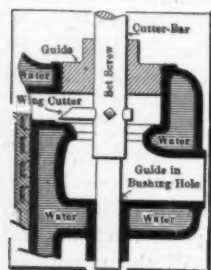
Section of a cylinder through a valve, showing a cutter bar in place and a wing cutter adjusted to take metal off the cylinder above the valve seat
